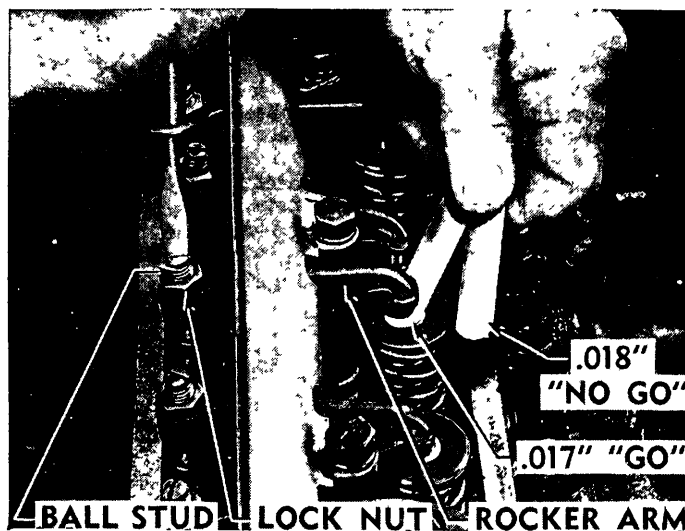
Adjusting valve lash on 1936-52 engines without hydraulic valve lifters (see text for details)
